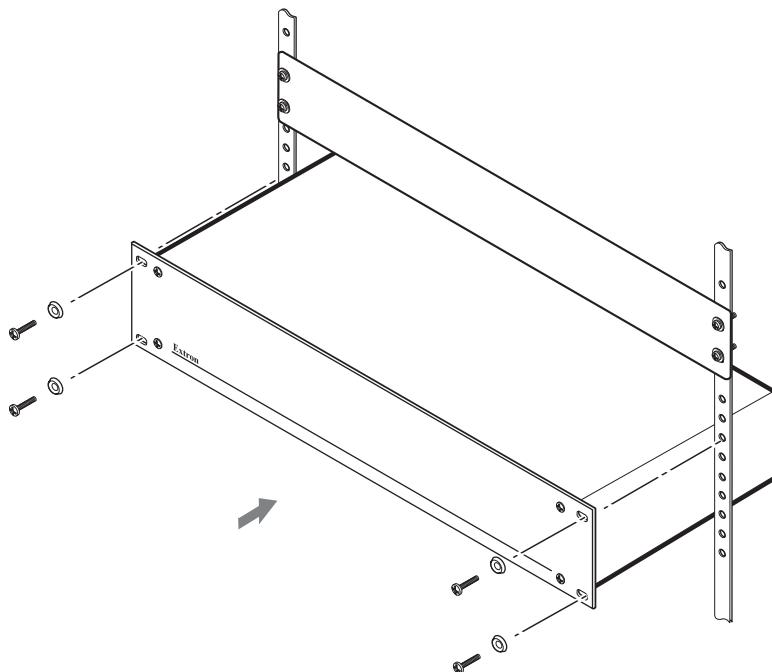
Rack Mounting the DXP to a 19-inch Rack
